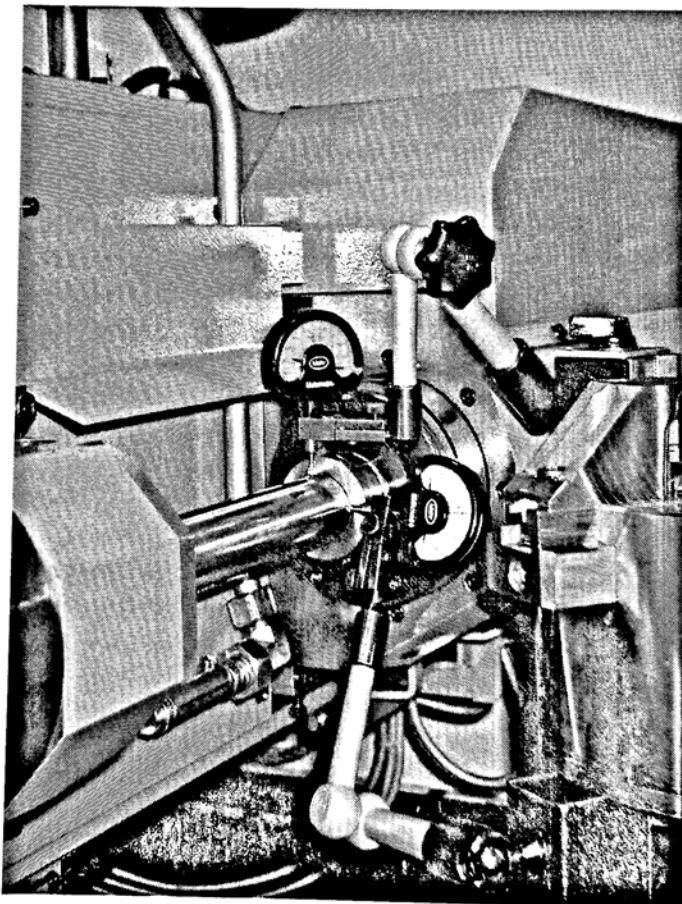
Clamp measuring arbor in the main bearing with the counter-bearing approached but not clamped
